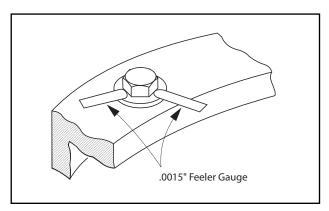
Swing Bearing Bolt Feeler Gauge Check
